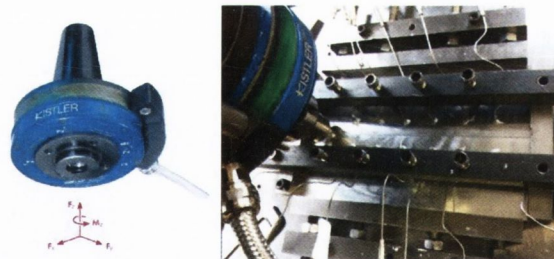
Kistler Dynamometer and FSW rig with thermocouples
